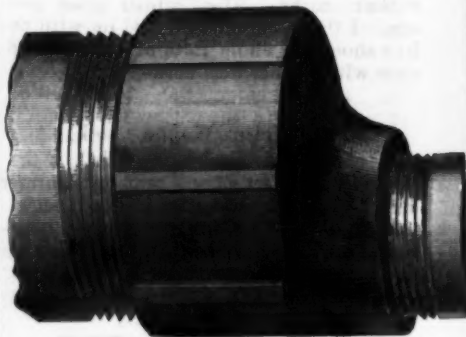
Patent Cast Thread Eccentric Reducers.
